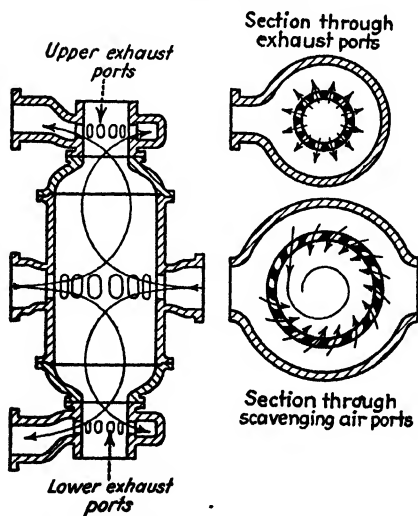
Method of scavenging Burmeister and Wain double-acting engine. (British Motor Ship.)
